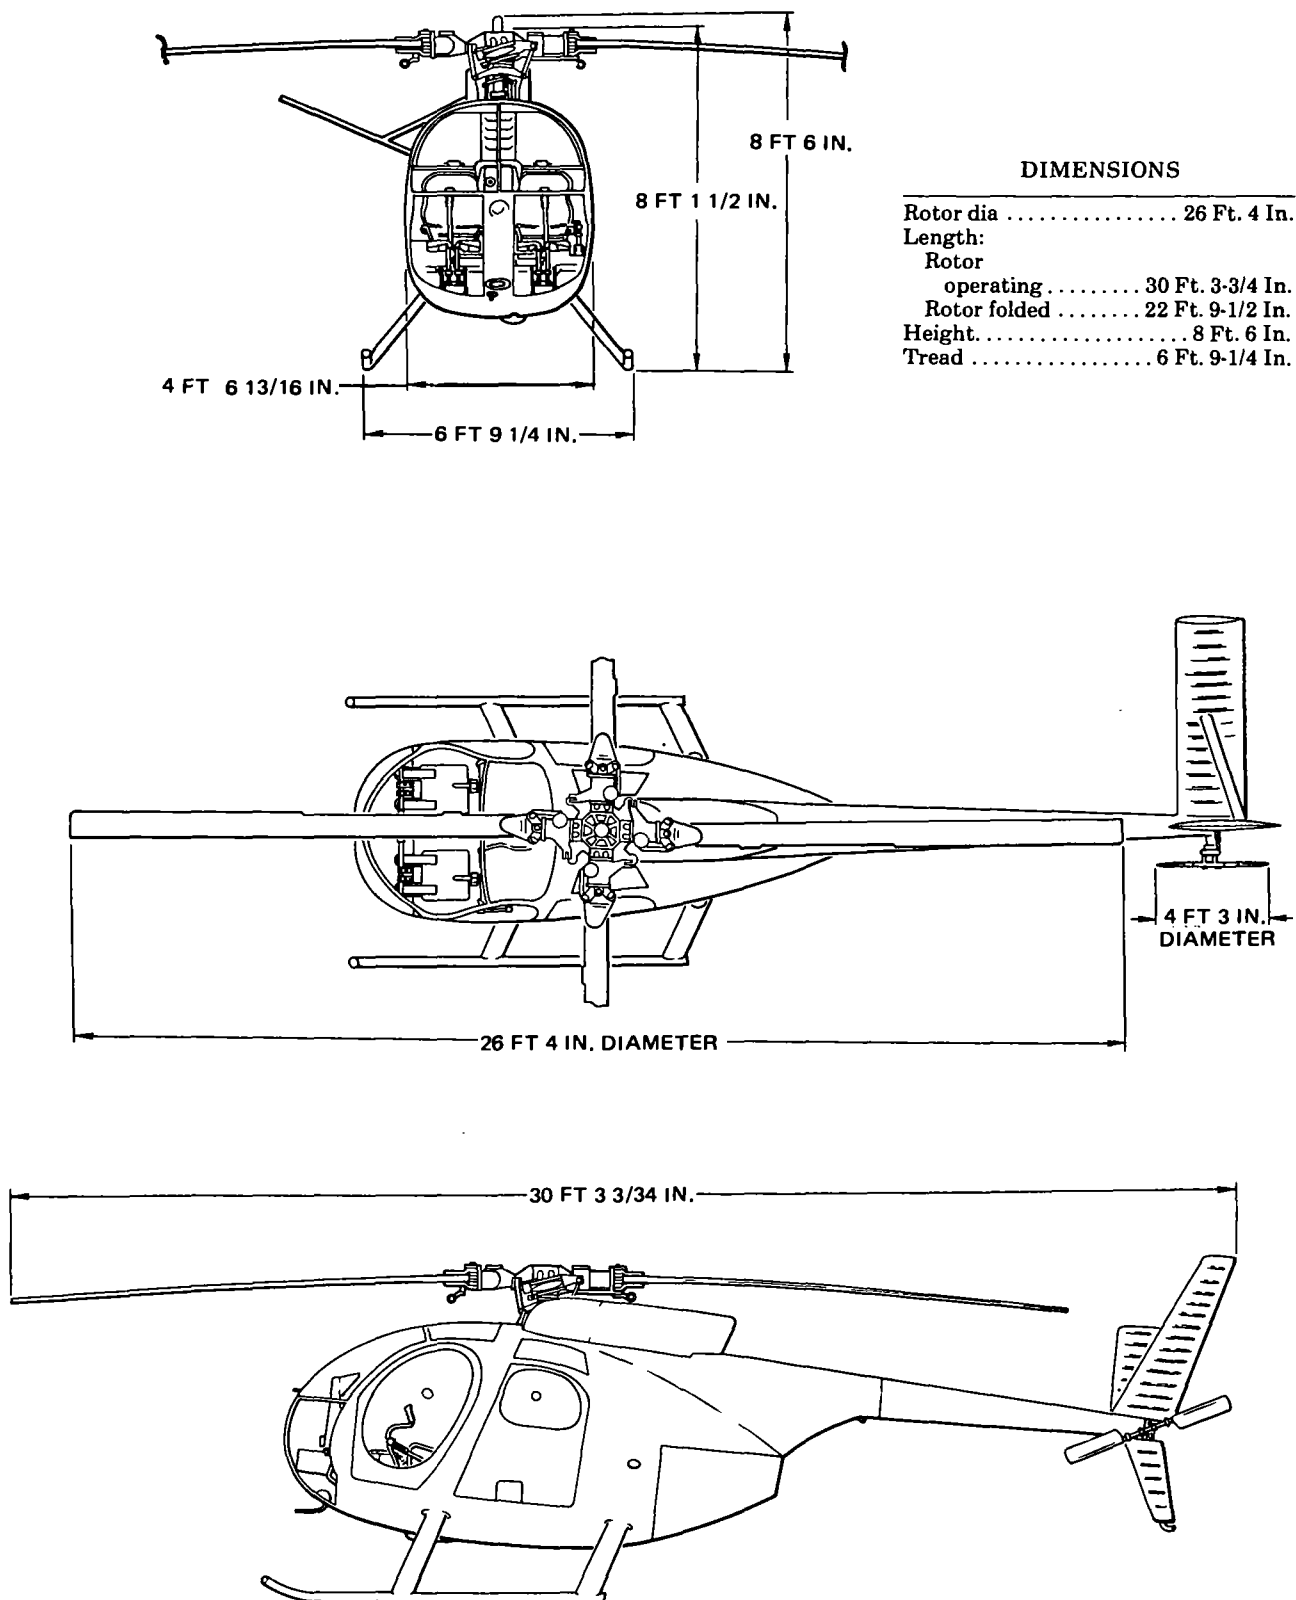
Principal Dimensions, OH-6A (Cayuse)
